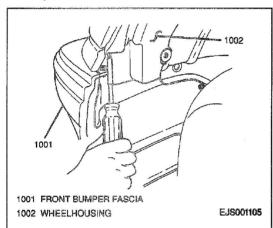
Removing Grille Retaining Screw From Wheelhousing
